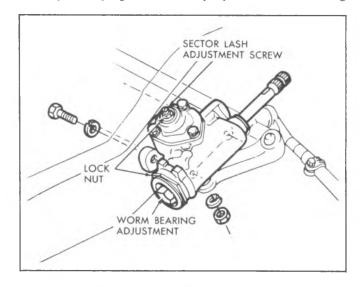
B-29-Steering Gear Adjustment Points-Typical
